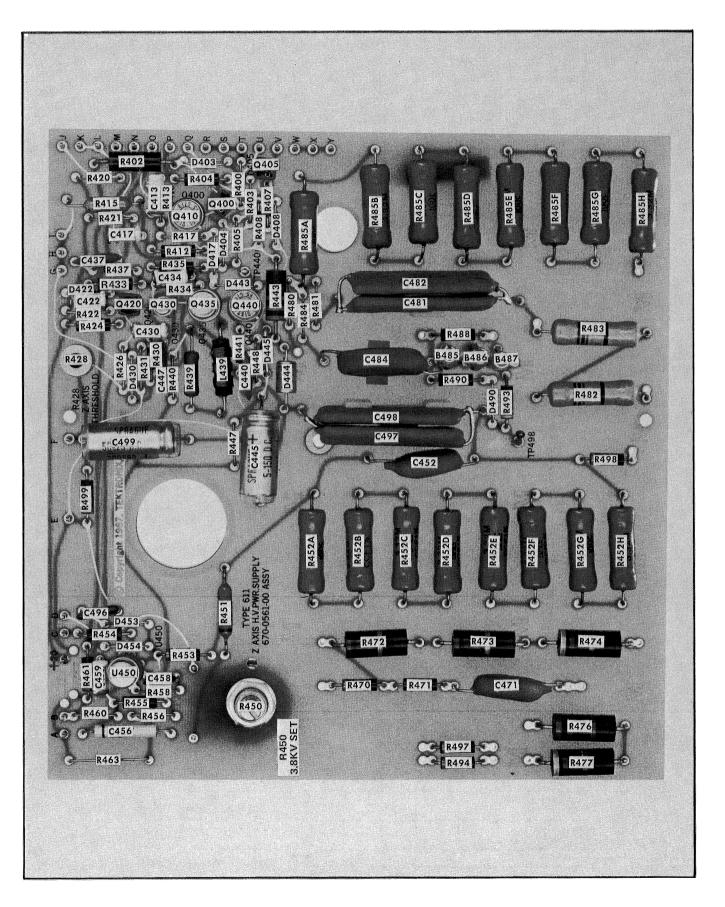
Z Axis and H.V. Power Supply circuit board, component location. For instruments below SN B150000.
